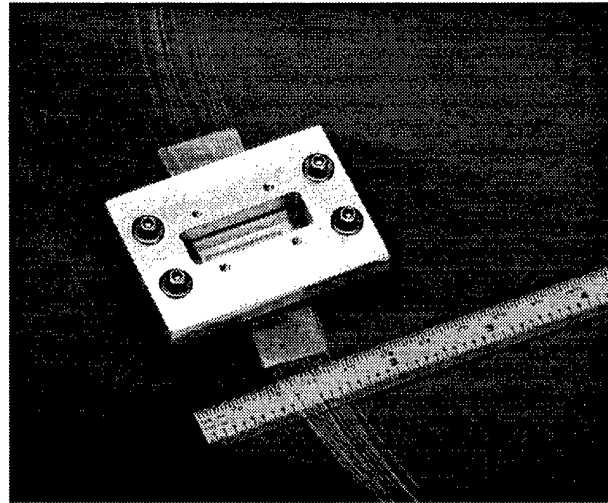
Photograph of finished optical assembly outside of alignment fixture.
